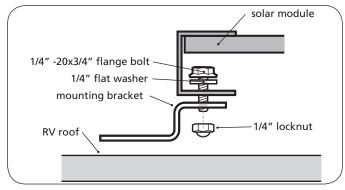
Attaching solar panel to 5-hole mounting bracket
